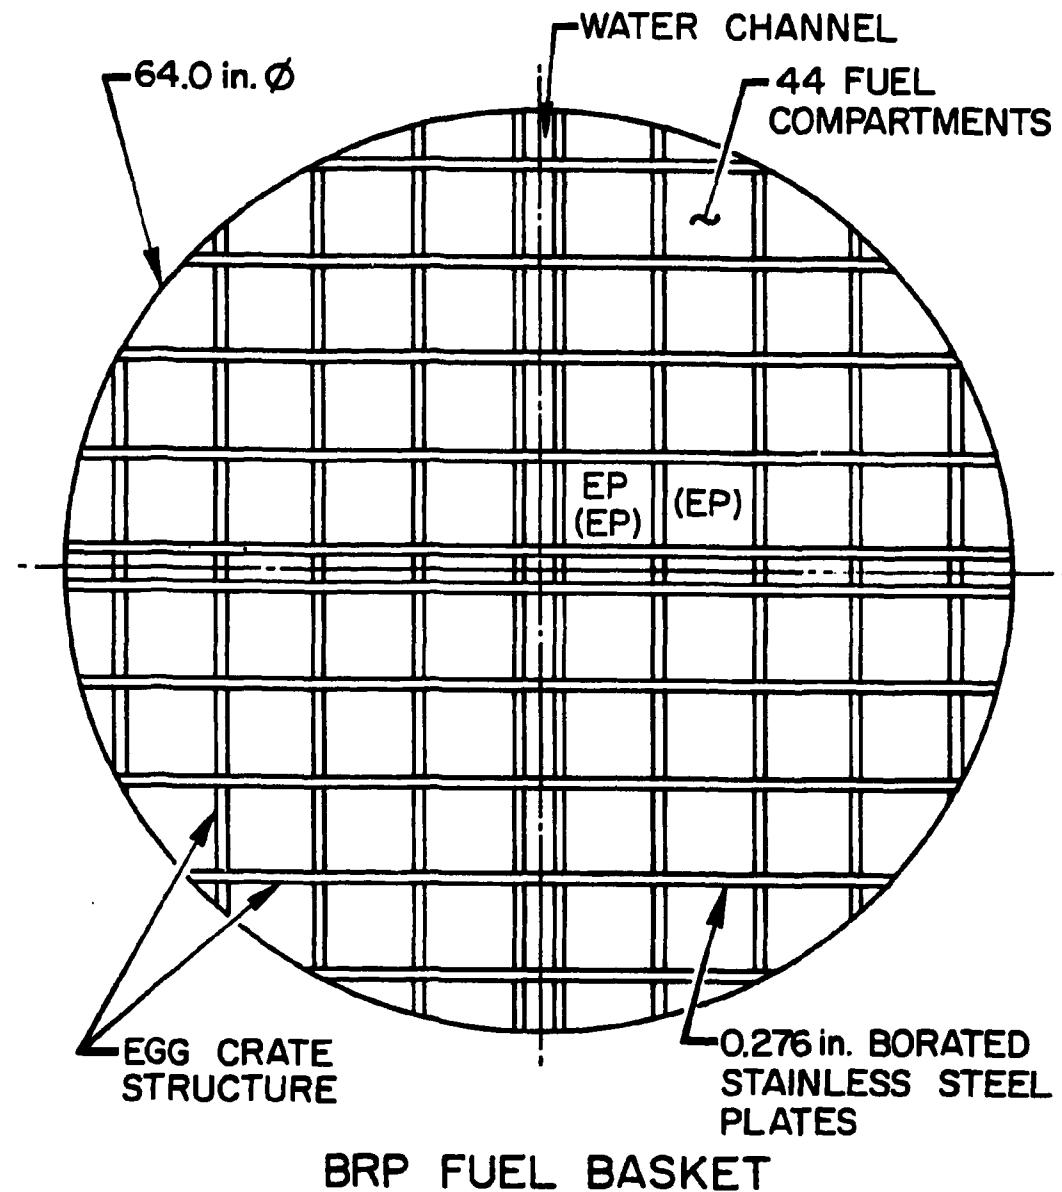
Location of EP fuel assemblies for case BRP5 loading.
